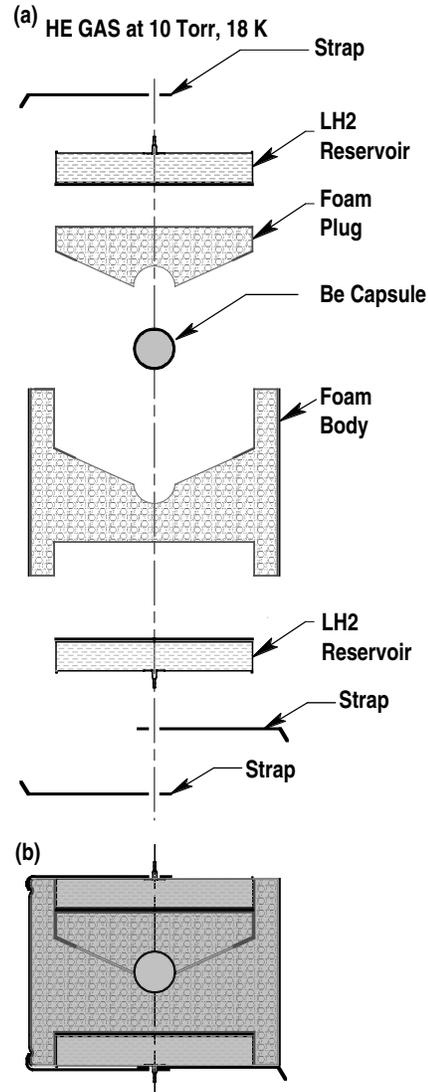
(a) Components of Z-pinch target subassembly, (b) completed target subassembly.
